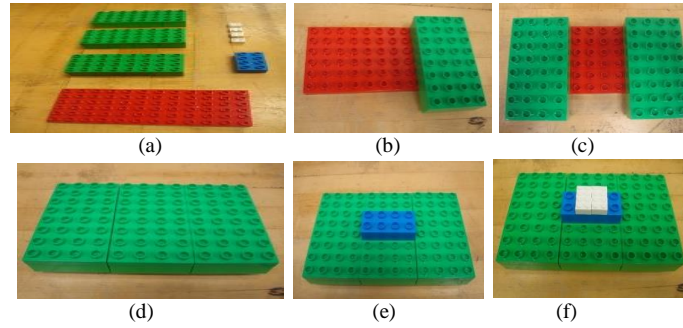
(a) All the parts that are to be assembled to produce the final (finished) assembled product, (b)-(f) the assembly sequence, and (f) the final assembled product.
